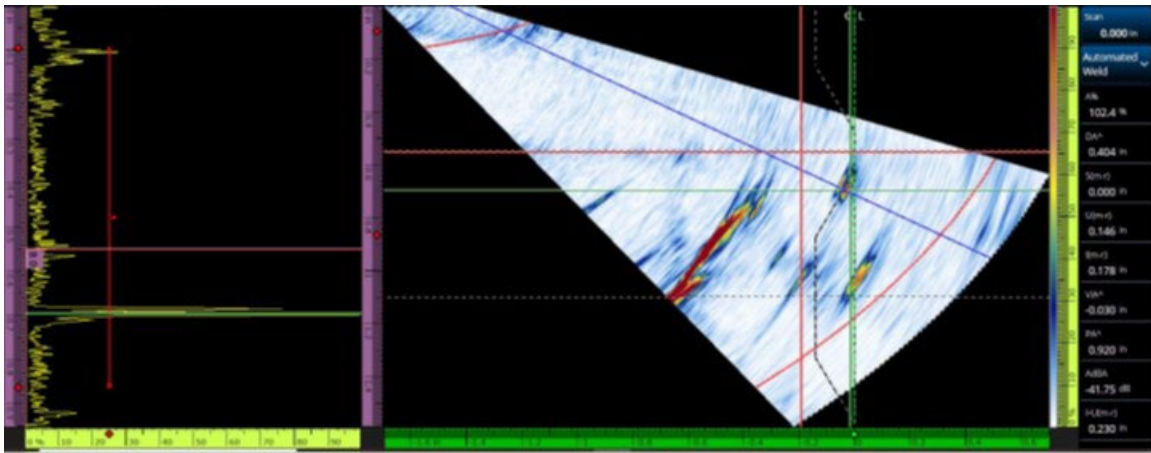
PAUT indication of defect at Location A in fillet weld test panel MGL-3 from Repad-raster scan
